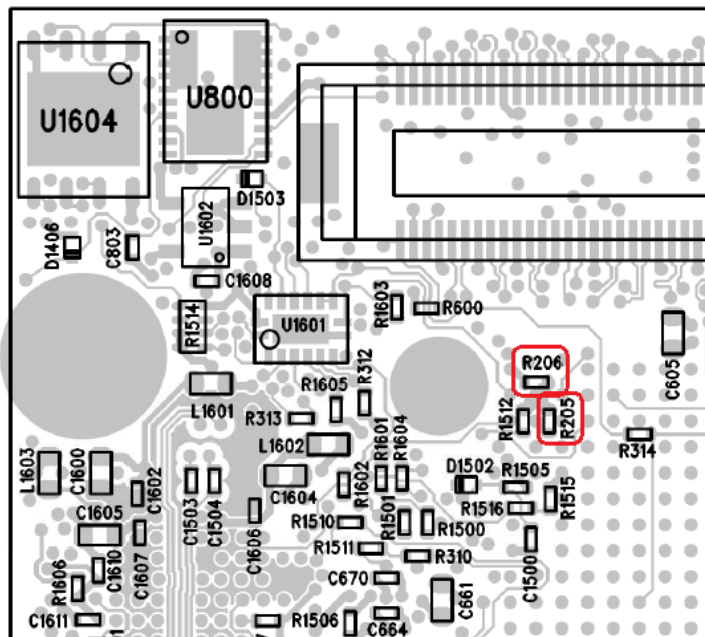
Pull-Up During Configuration (PUDC) Resistors - Assembly Drawing Bottom View (upper left corner) for Revision 4 Modules
